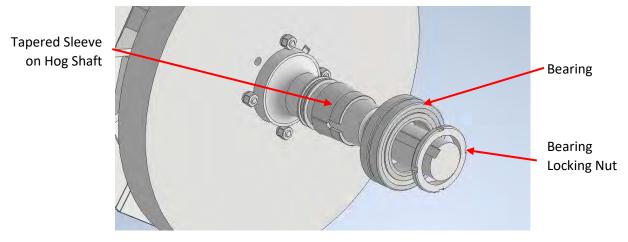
Bearing Nut, Bearing, and Tapered Sleeve
